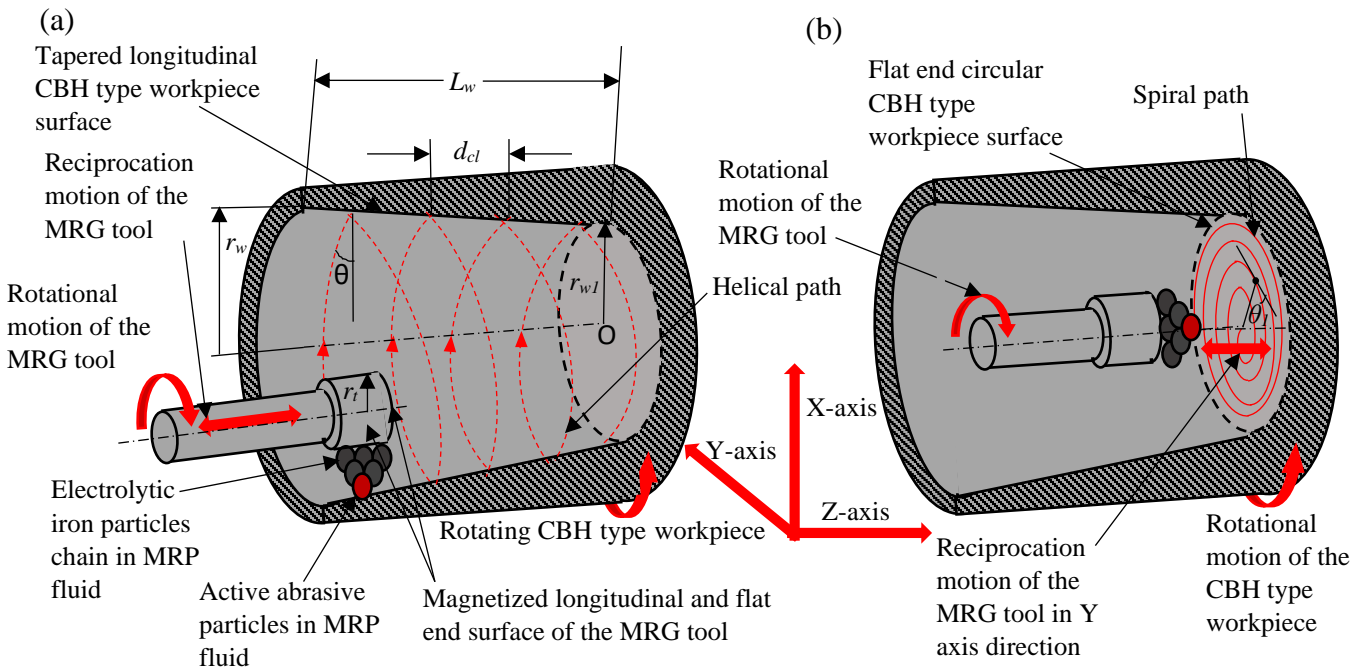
Schematic diagram of the finishing mechanism in a (a) tapered longitudinal and (b) flat end surfaces of the cylindrical blind hole (CBH) type workpiece using the magnetorheological grinding (MRG) tool.
